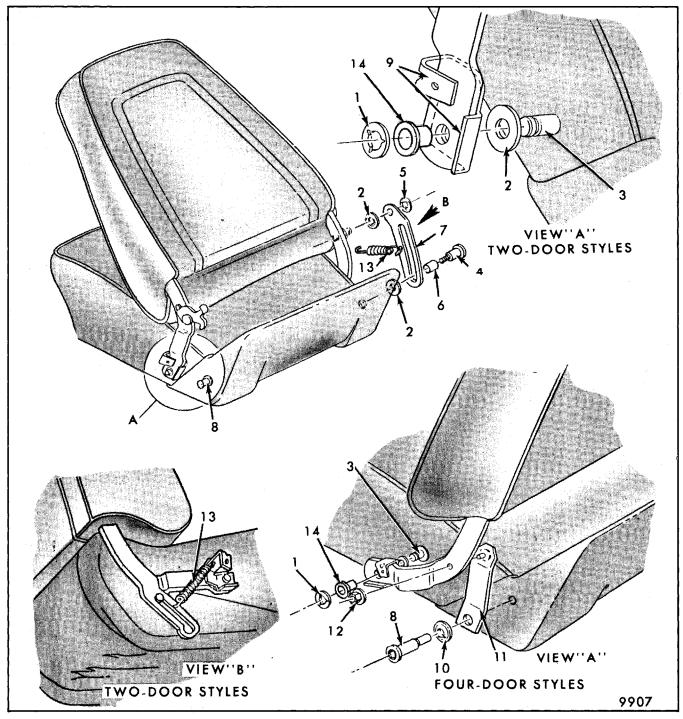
Bucket Seat Back Assembly - F, H and X Styles
